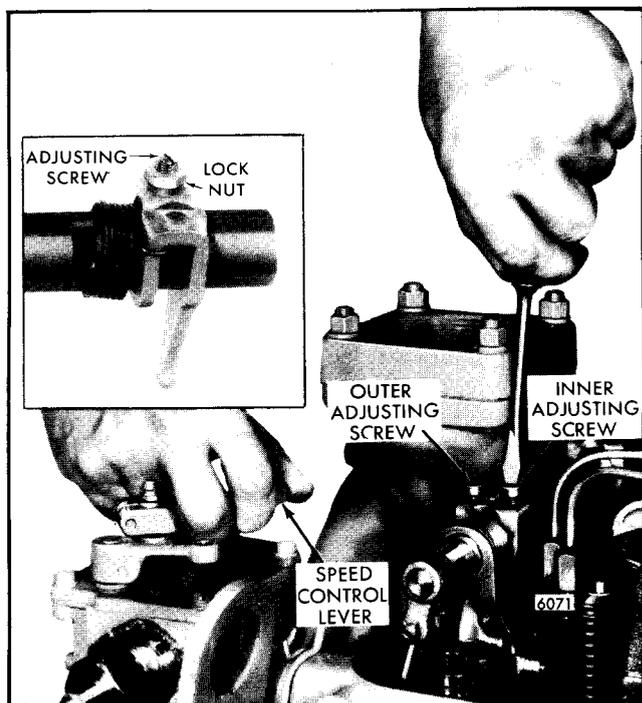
Positioning the Rear Injector Rack Control Lever
